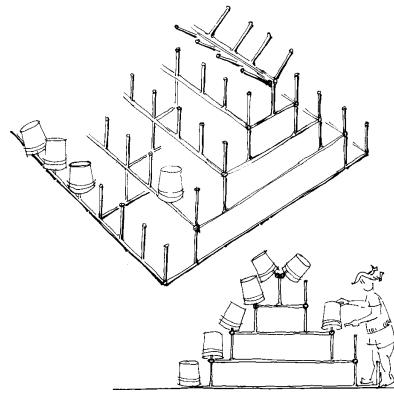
A Welded Pipe Rack for Storing Containers.
